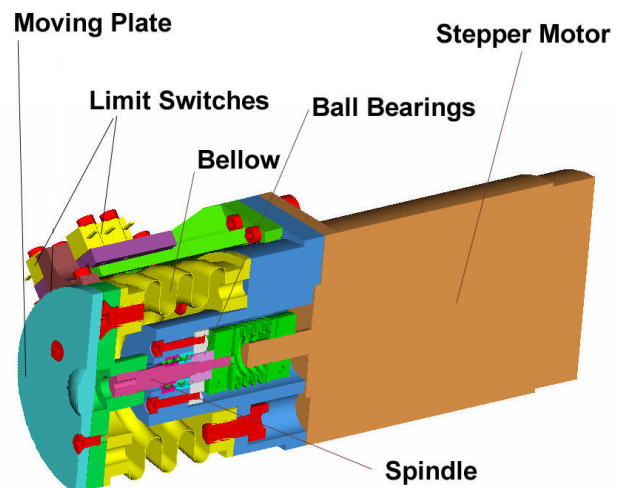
Test device including linear actuator without planetary gear mounted and cut through this actuator.
